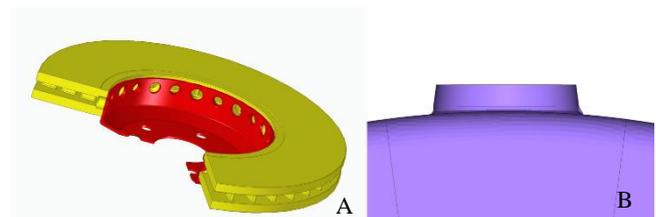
Geometry of the plug-in brake disc with the steel hub: A section view of an example assembly; B detailed look at a single locking pin at the hub
